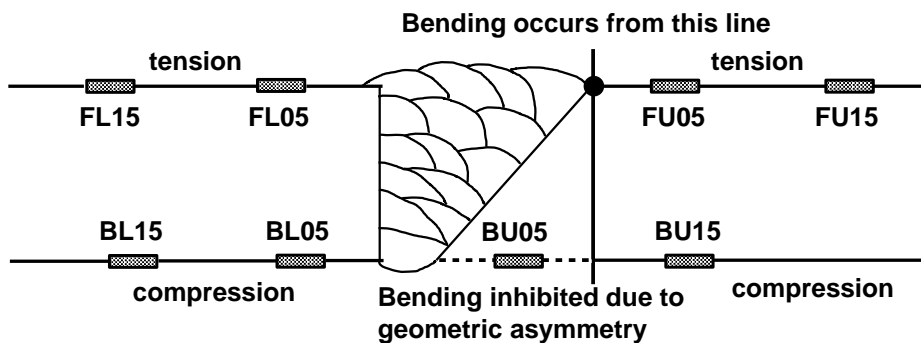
Geometric asymmetry of 2G specimen's weld bead.
